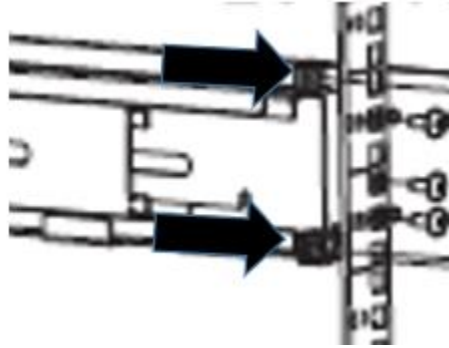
Install Cage Nuts in the Front Equipment Rail with Square Holes
